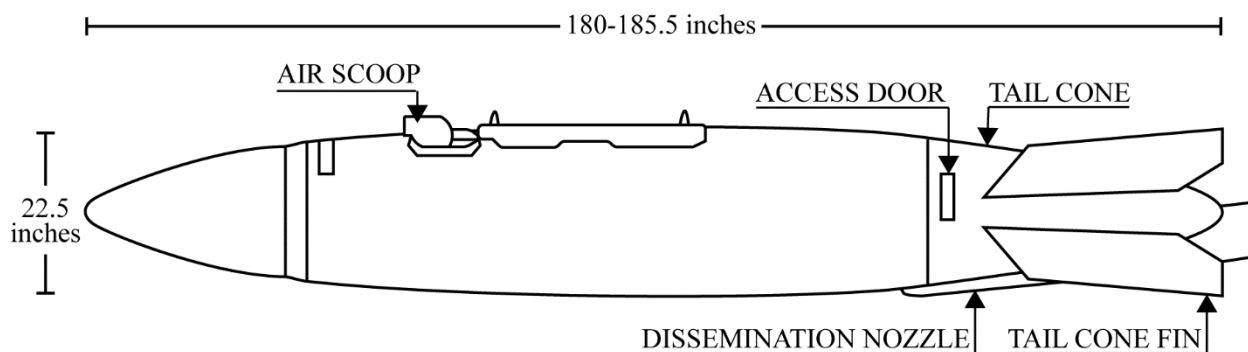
Tank, Aircraft, TMU-28/B - Line Drawing
